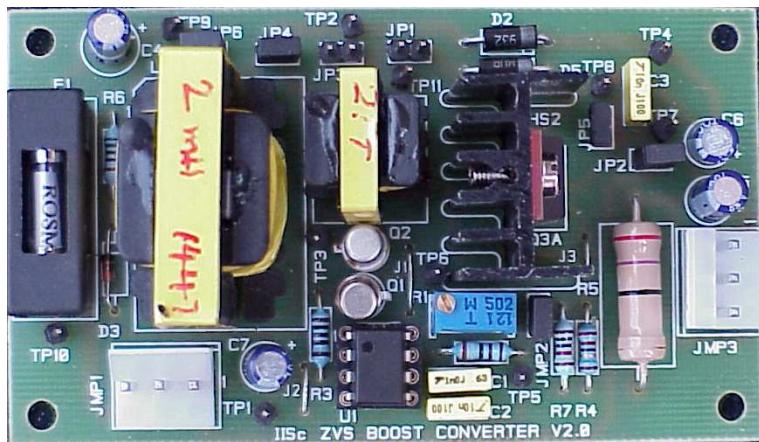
Mounted PCB Board of ZVS-Boost Converter
